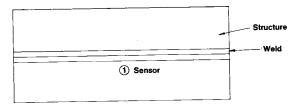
Typical Sensor Placement for Single Channel AE Monitoring of a Linear Weld
